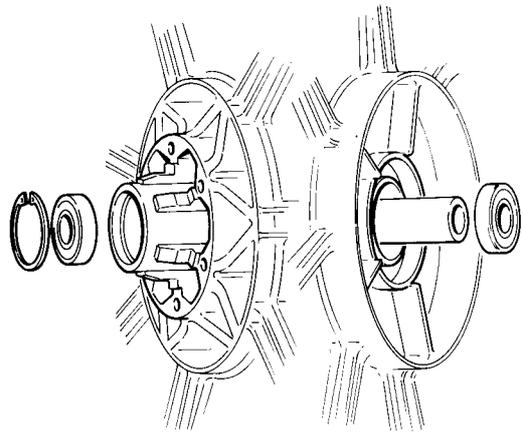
Removal and Refitting the Rear Wheel Bearings.
